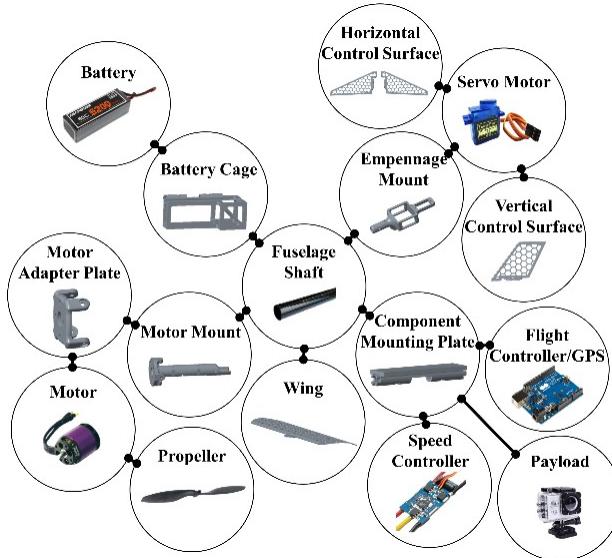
FIXED WING PLATFORM GEOMETRIC INTERFACES
